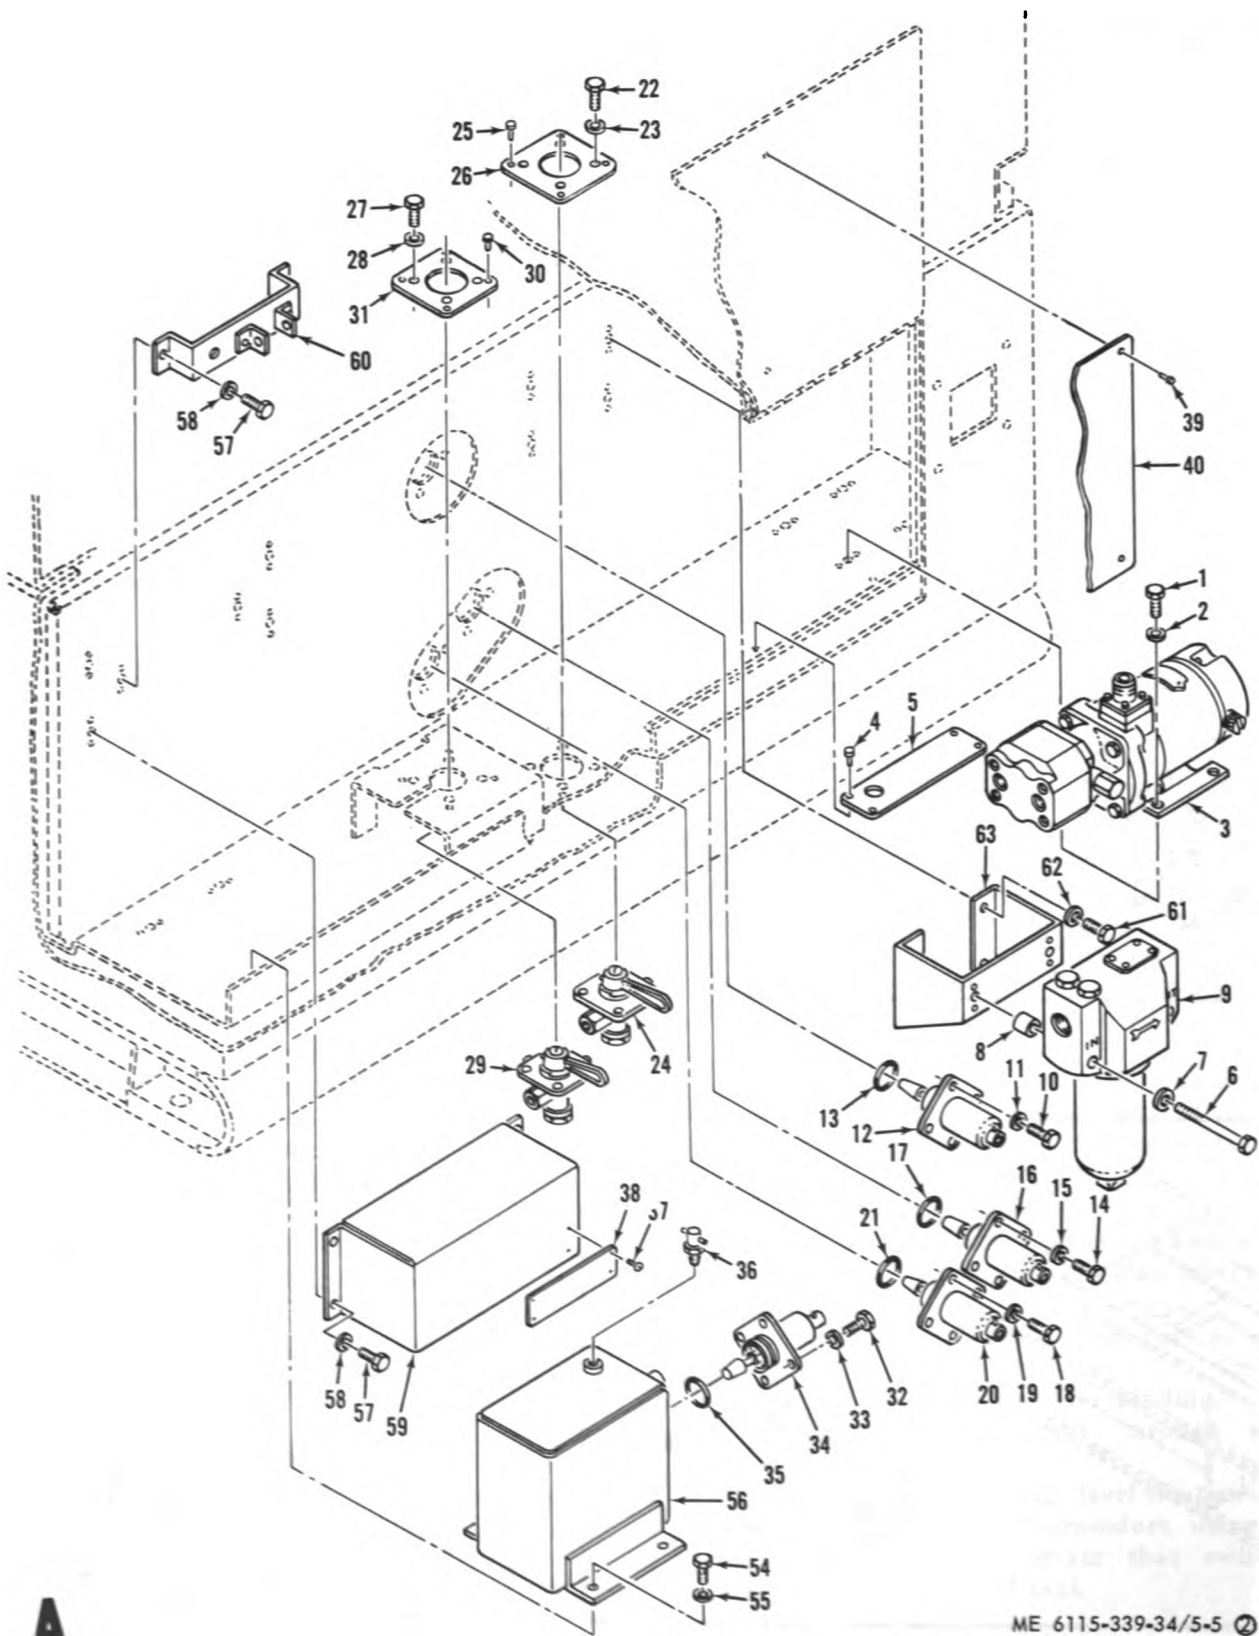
Fuel supply system accessories removal and installation. (Sheet 2 of 4).
